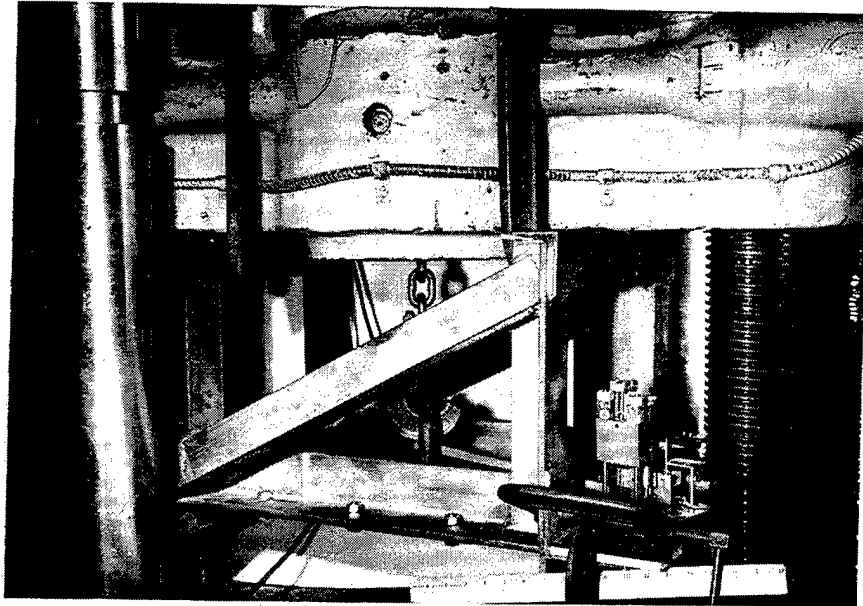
A view of the test jig placed in position under the lower fixed crosshead of the testing machine. It is set up for the straight-out pull test whereby the hook will pull on the U-shaped bar straight up from the test plate on the jig when the load is applied in tension during the test. Note the deflectometer in place on the test jig for the pull test.
